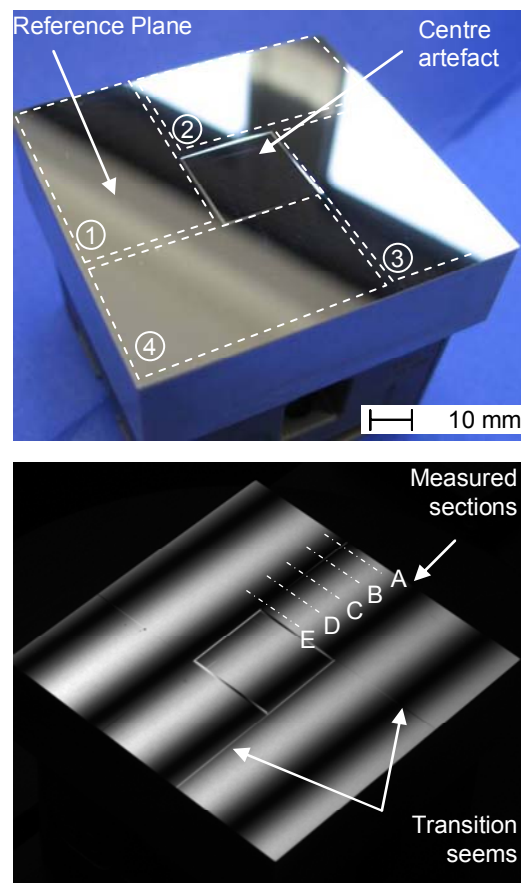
Test sample geometry and measured features (surfaces: 1-4; sections: A-E)
